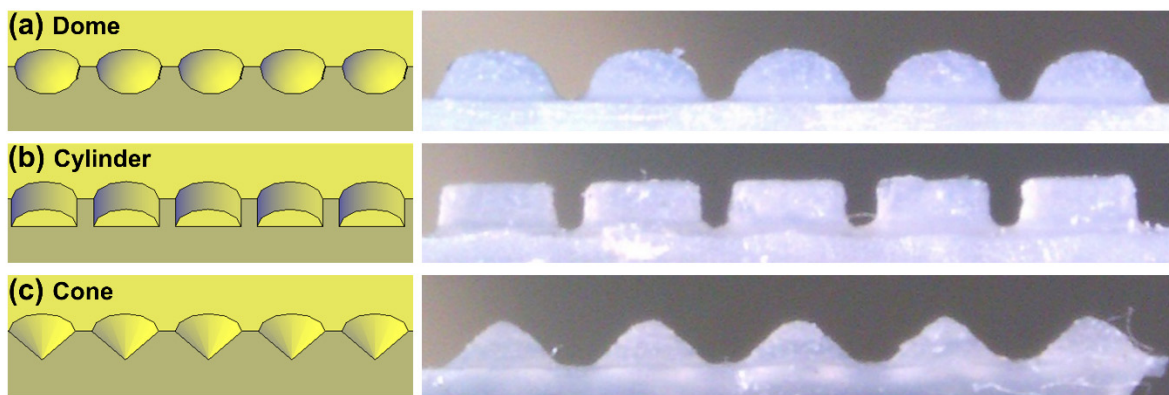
3D CAD design and the SEM images for fabricating PDMS mold and fabricated PDMS, (a) dome shape, (b) cylinder shape, (c) cone shape
